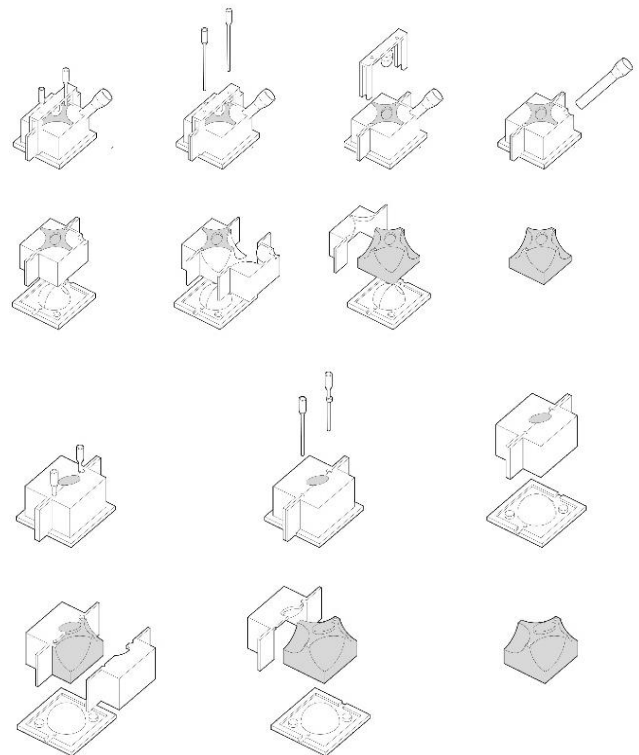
(top-row) the five-part mold for Cradle's module type-A, with bird entrance; (bottom-row) the three-part mold for Cradle's module type-B.
